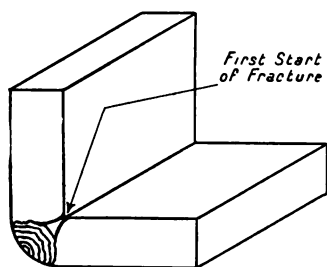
NOT FULLY PENETRATED, FIRST STARTING OF FRACTURE.
